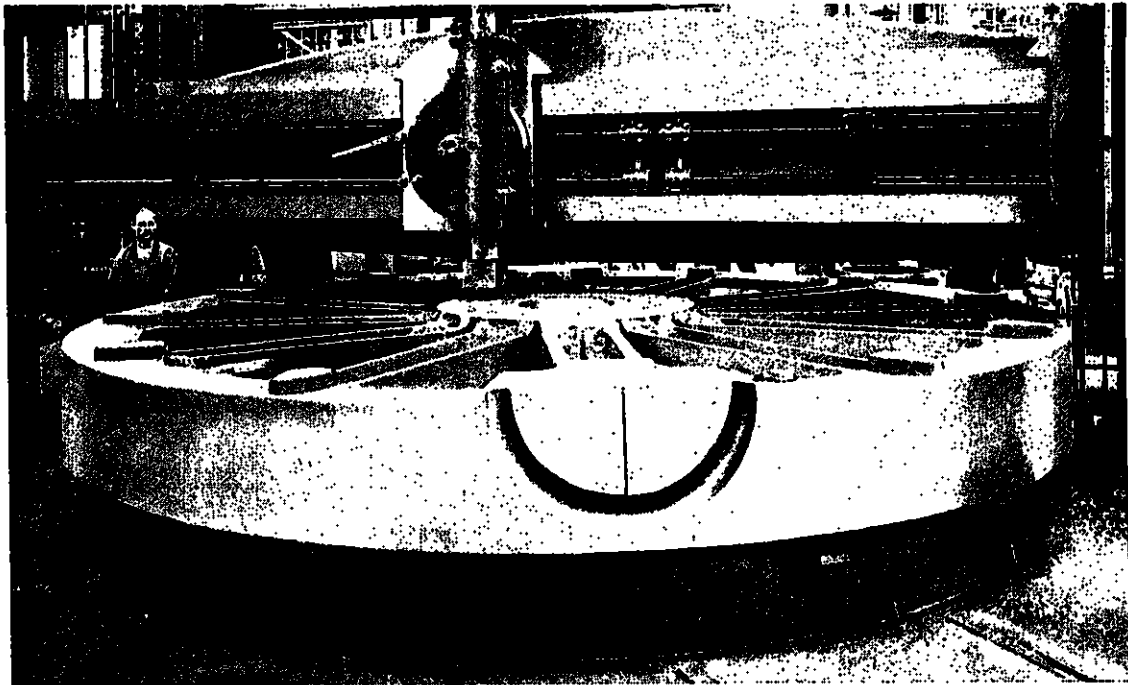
A rotor half undergoing machining on large turning mill in the Emaus works.
